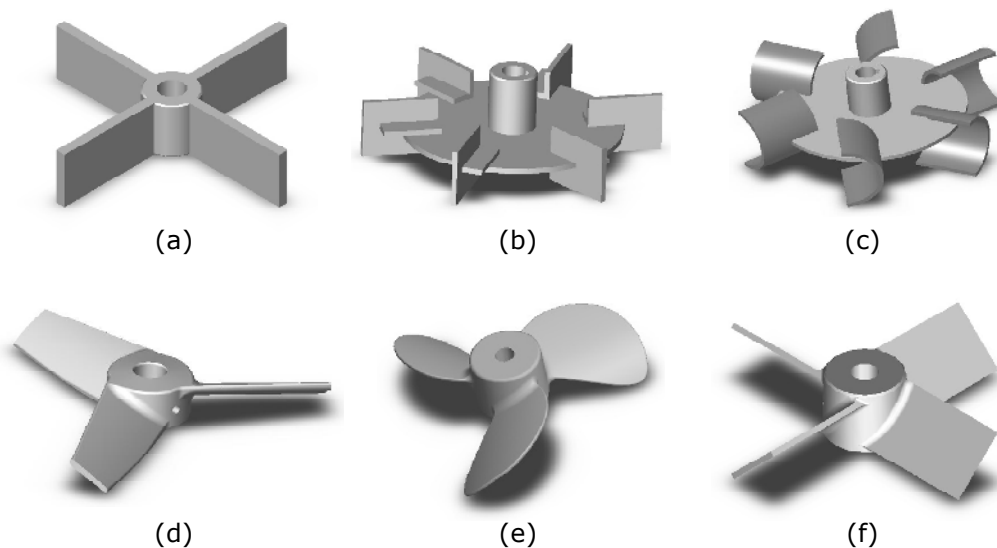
Examples of radial flow impellers, (a) flat paddle impeller, (c) Rushton disc turbine, (c) Smith turbine; axial flow impellers, (d) hydrofoil impeller (e) marine propeller; mixed flow impeller, (f) pitched blade turbine.
